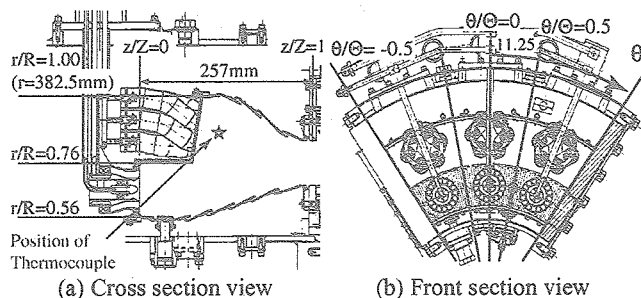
Section views of the model combustor (Test piece⁽¹⁾)
